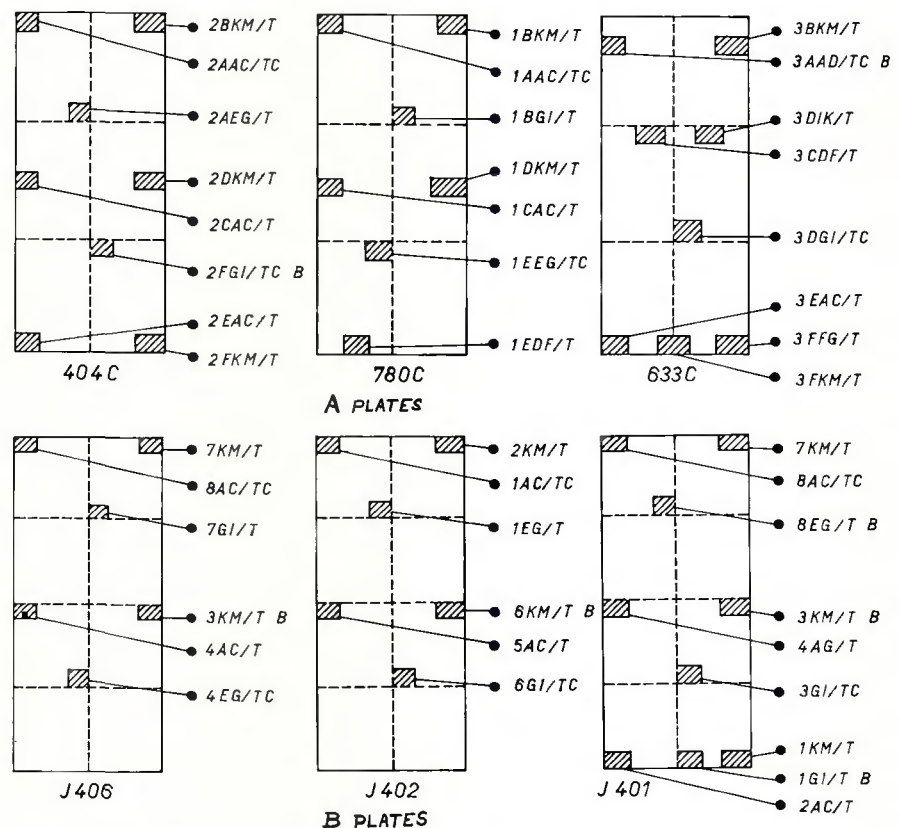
Position within plates of testpieces: T — tensile tests; C — chemical analysis; B — bend tests
